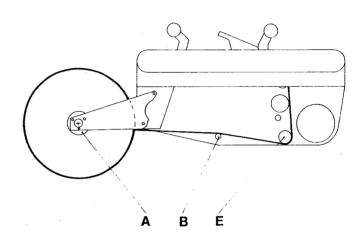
TAPE LOADING AND THREADING Left Side View - Bottom Taping Head
